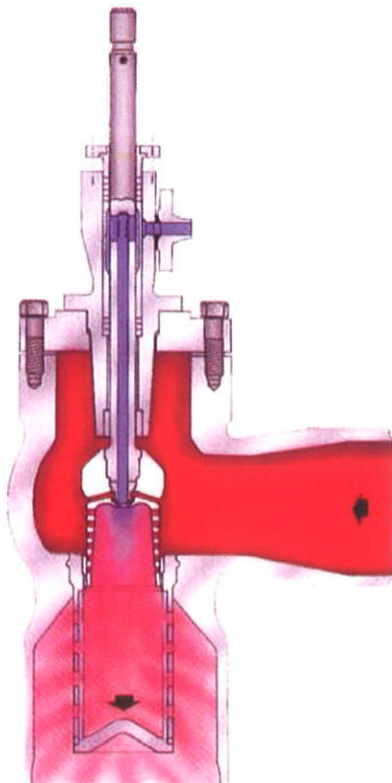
Steam conditioning valve with atomizing nozzle incorporated in the valve cone
